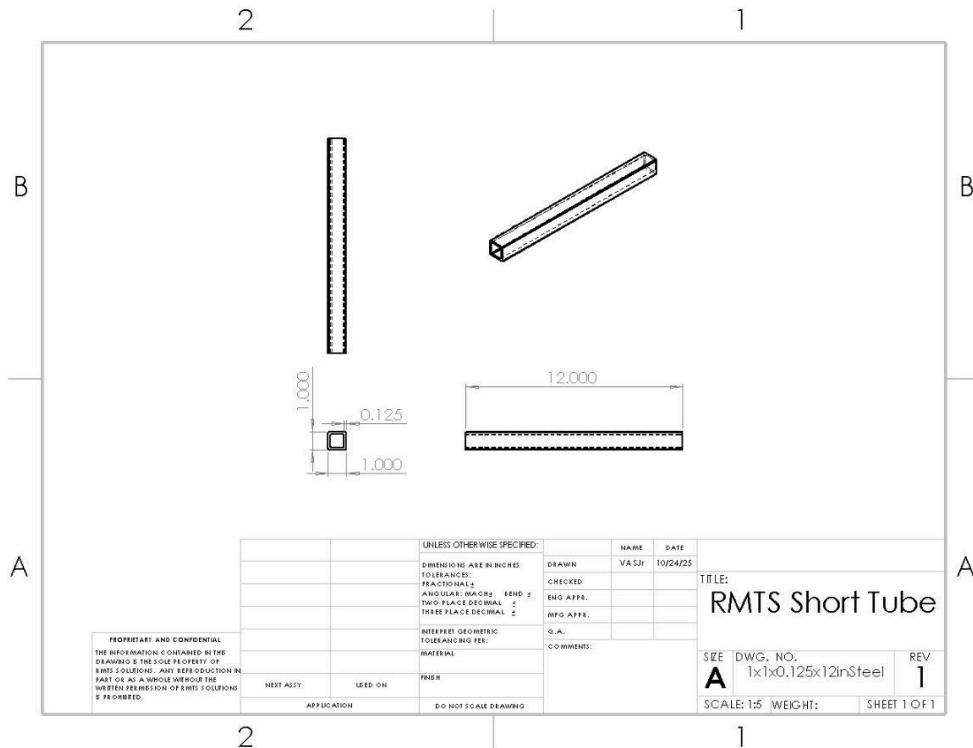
Figure X: Drawing of 1"x1"x1/8" square steel tube cut to 12 in
